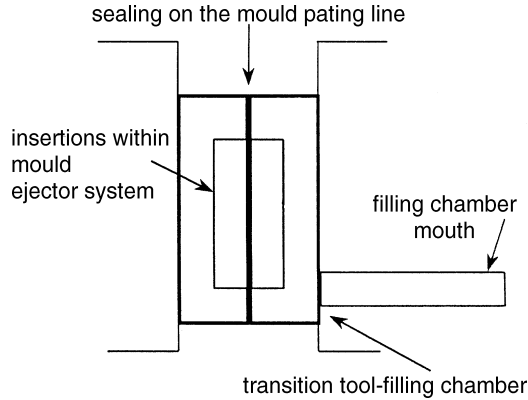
Schematic diagram of a tool-sealing during vacuum die-casting
